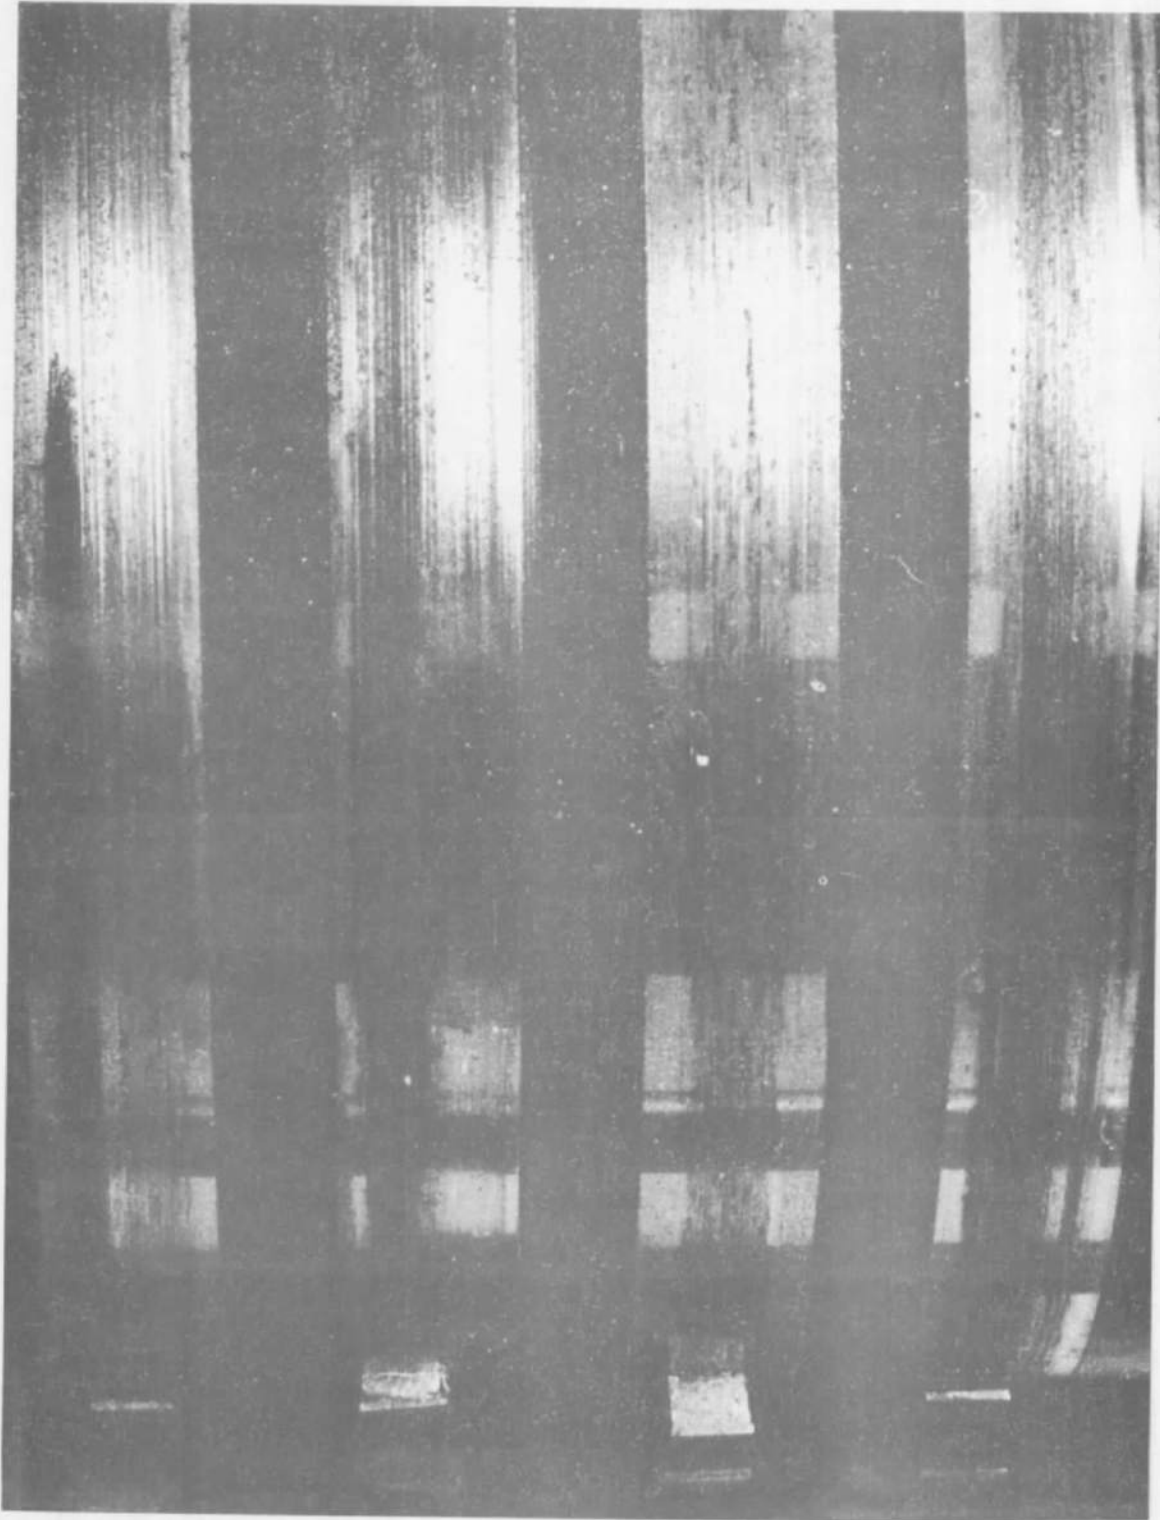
Detail on Rings 16 to 19 of Assembly 1 After Testing
